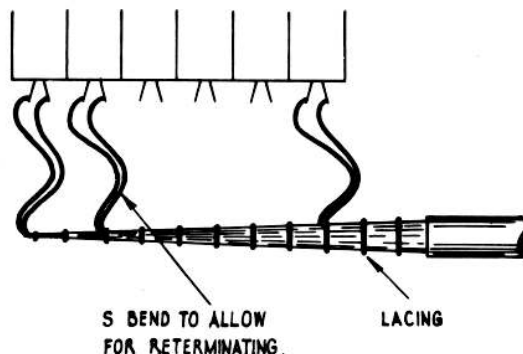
FORMING SPARE WIRE ON LAMP AND JACK STRIP TERMINATION.
